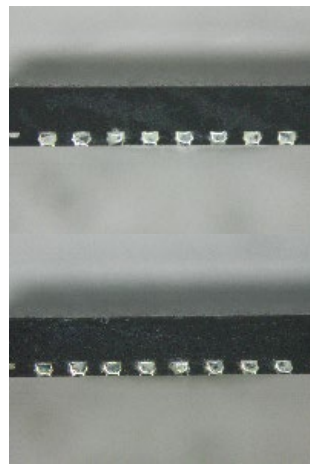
acceptance criteria for solder wetting of QFN side flanks
